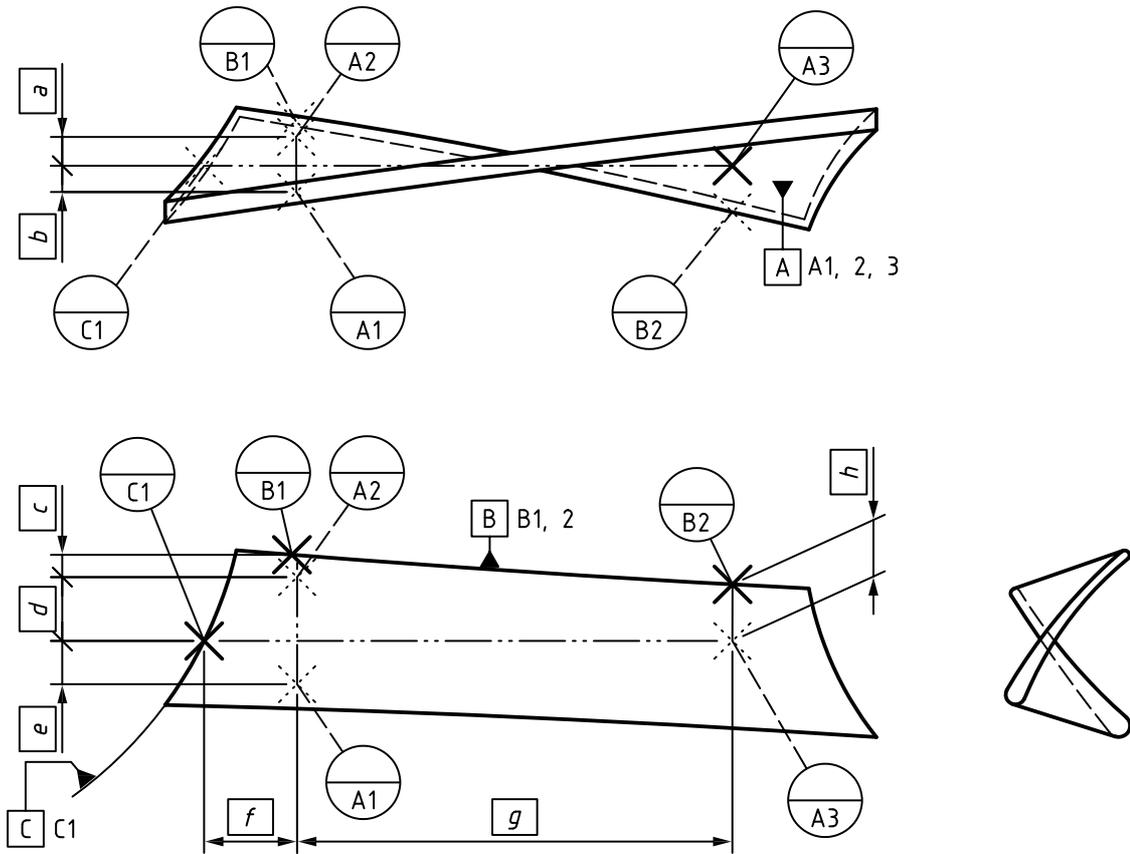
Example of indications of datum targets on complex surfaces
